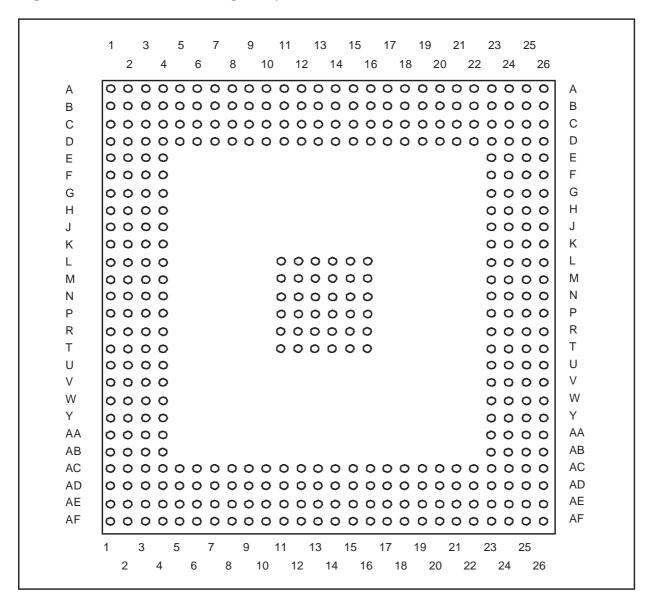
388-pin PBGA Package - PCB Dimensions
